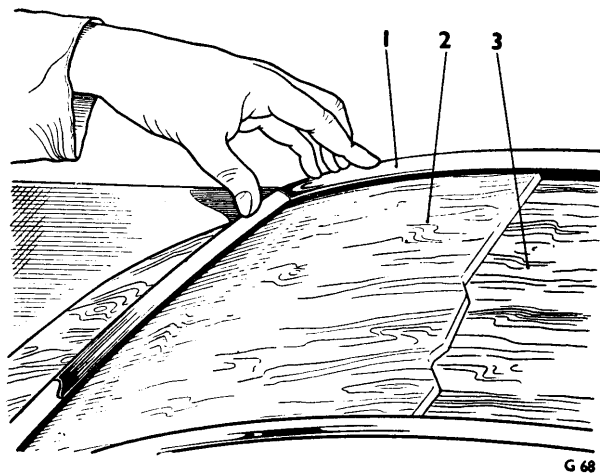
CHECKING THAT THE EMBELLISHER CONFORMS TO THE SHAPE OF THE WINDSCREEN
